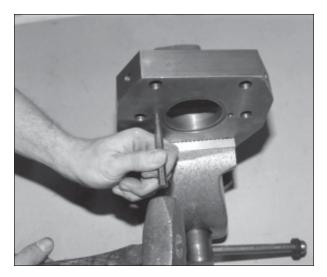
Use a dowel pin or punch to remove bearing race from top plate.
